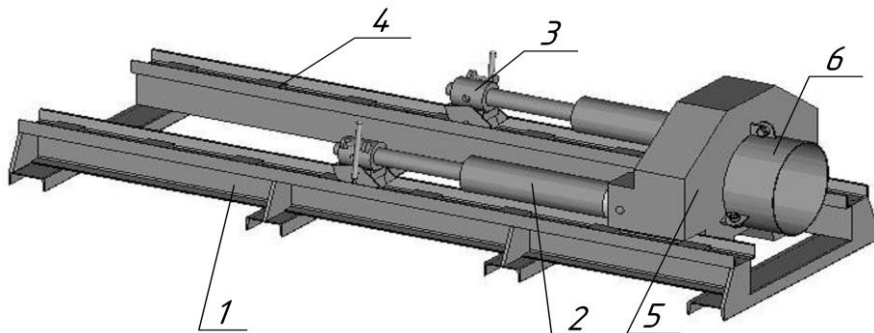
General view of the auger-boring machine's support-guide system in the final position: 1- modular multipart frame; 2- hydraulic jack; 3- movable thrust shoes; 4- fixed stops of the modular frame; 5 - power frontal part of the running carriage; 6- casing pipe's sectional column.
